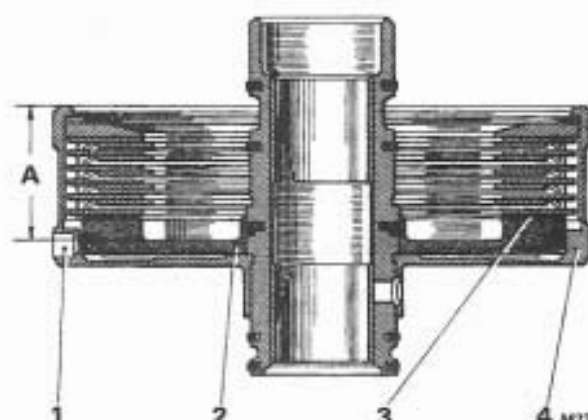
CHECKING CENTRE CLUTCH PISTON TRAVEL
